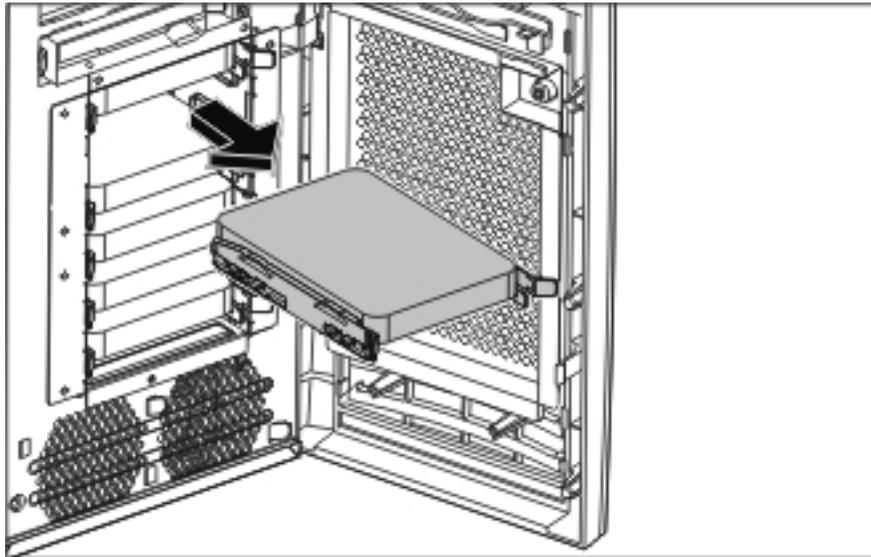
Removing the SCSI non-hot-plug hard drive
